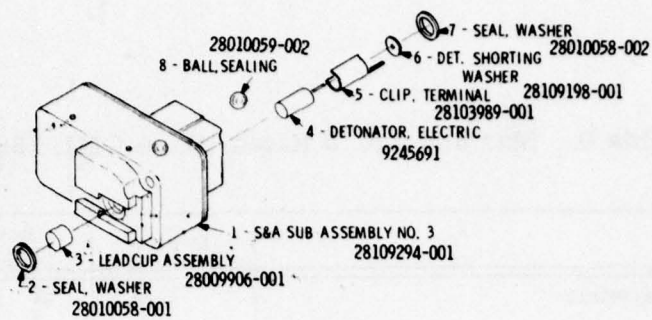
Machine No. 5 - S&A Mechanism Detonator and Lead Cup Assembly
